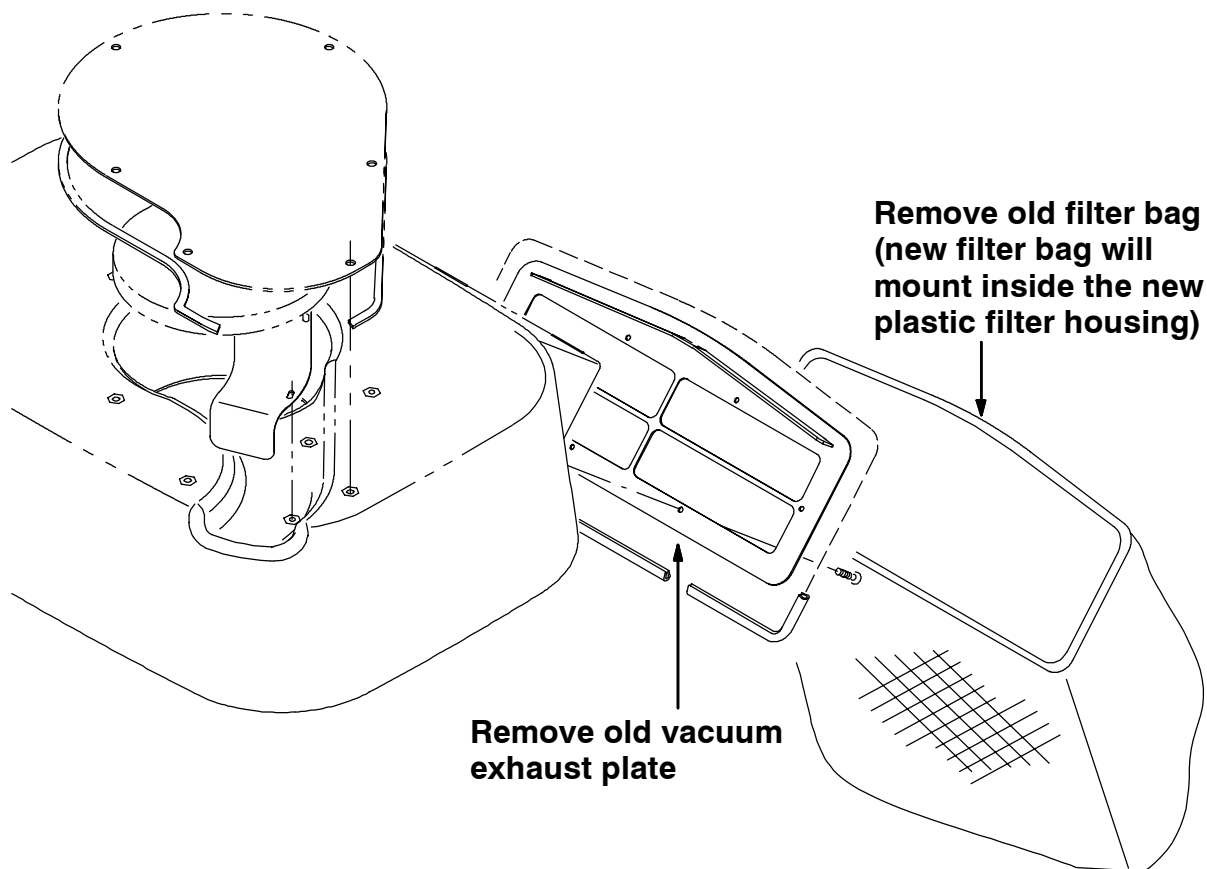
FILTER BAG AND PLATE REMOVAL
